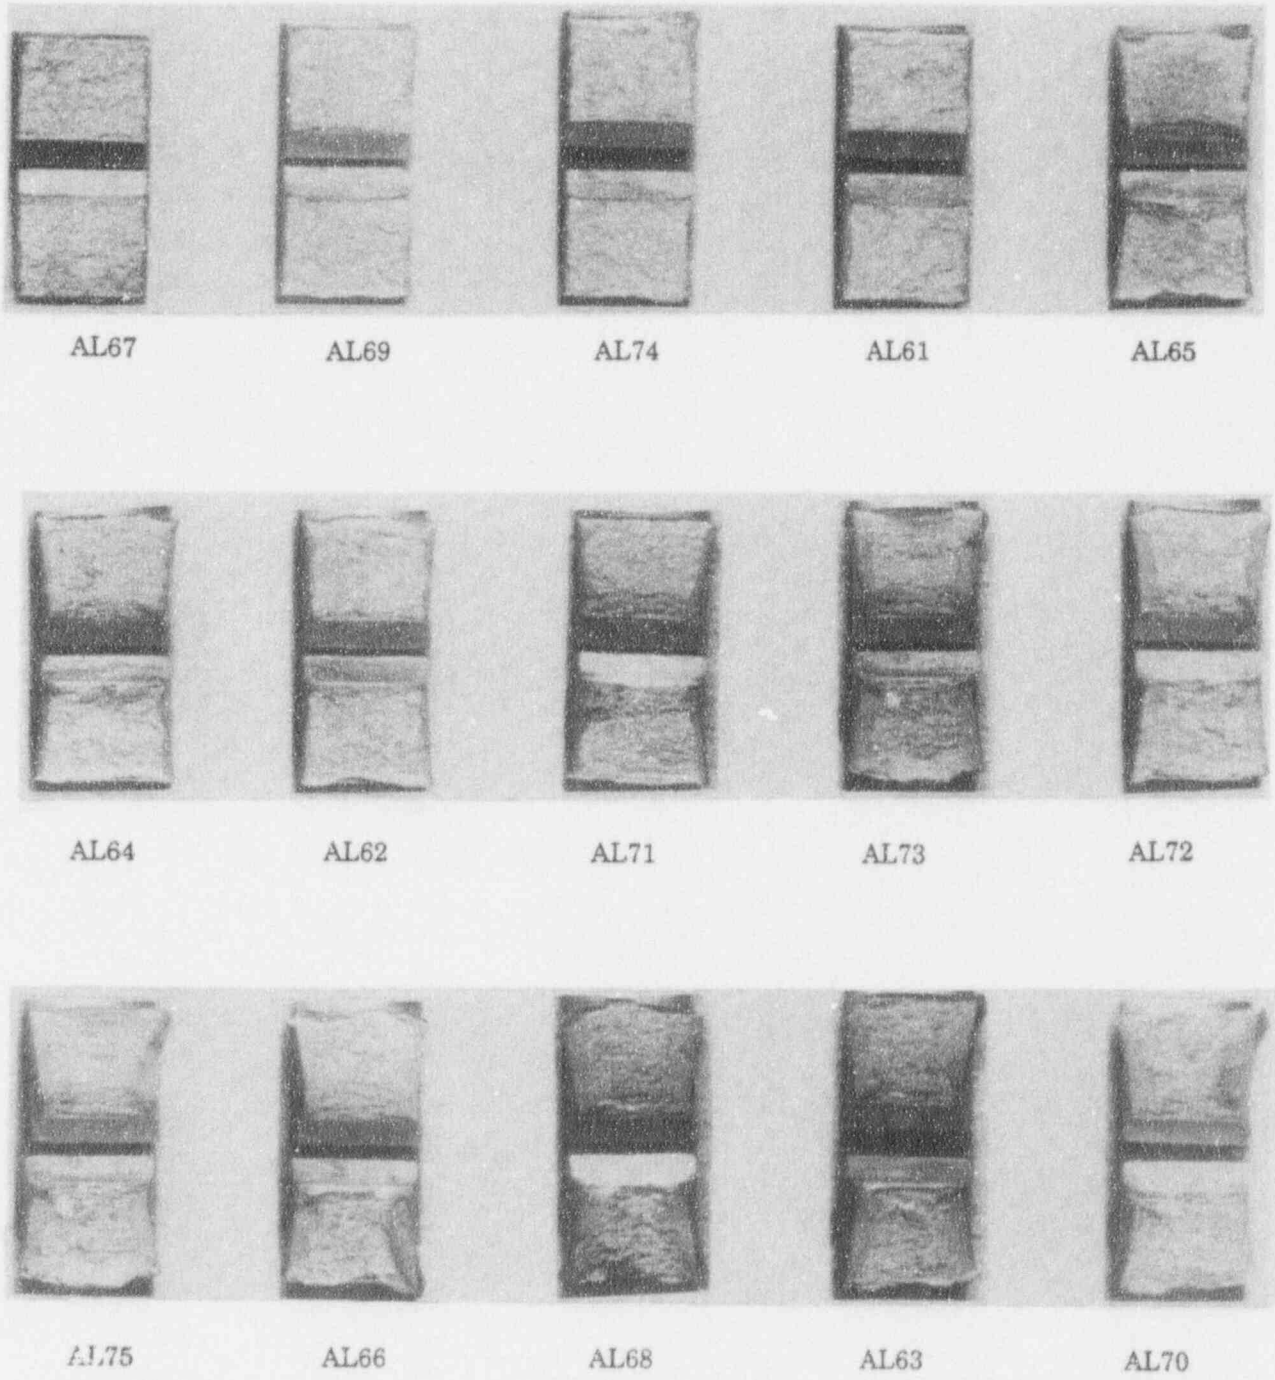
Charpy Impact Specimen Fracture Surfaces for Vogtle Unit 1 Reactor Vessel Intermediate Shell Plate B8805-3 (Longitudinal Orientation)
